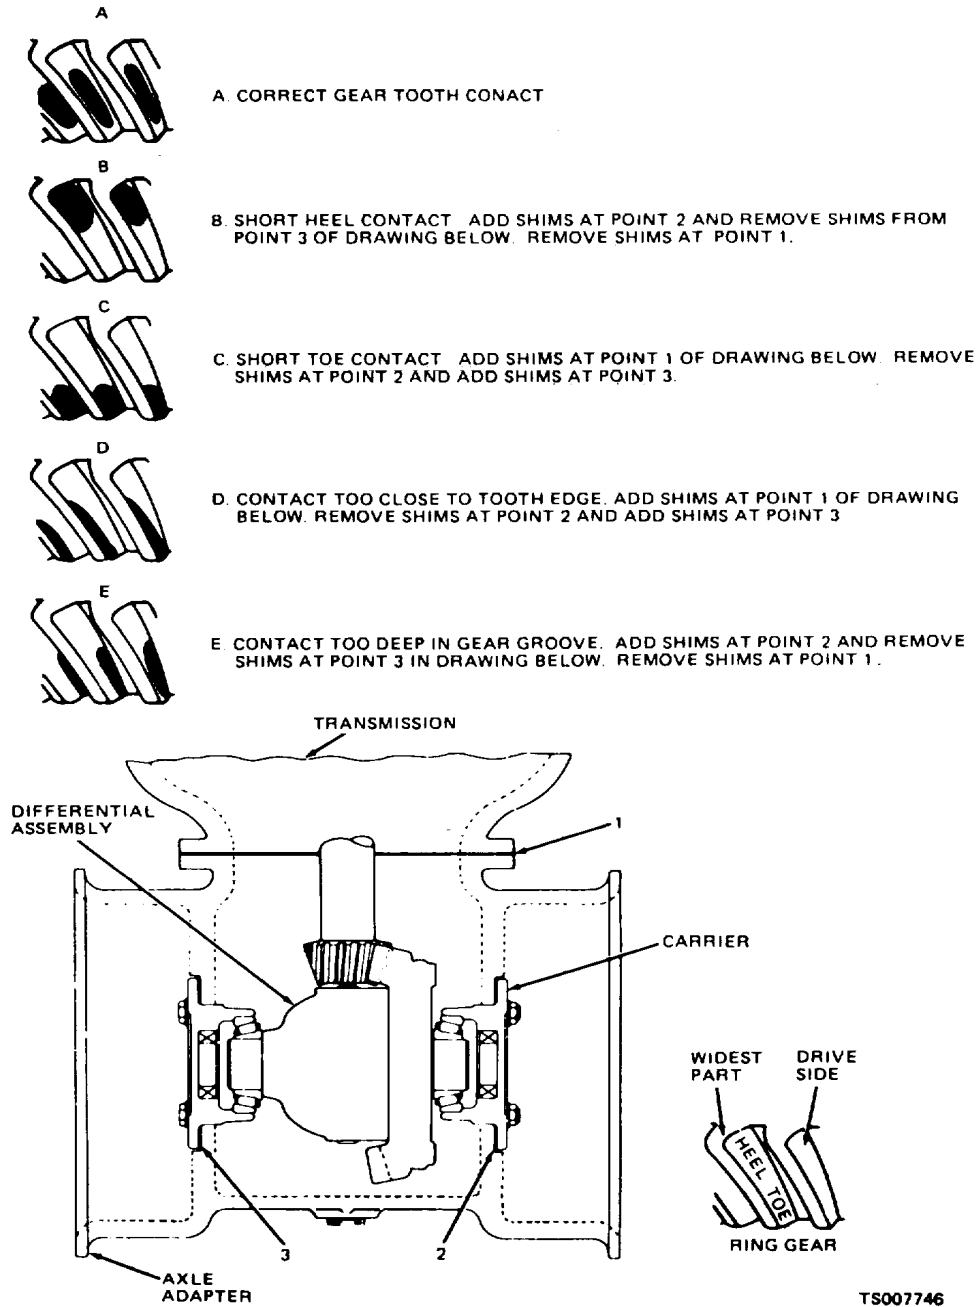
Ring Gear and Pinion Tooth Contact Patterns.
